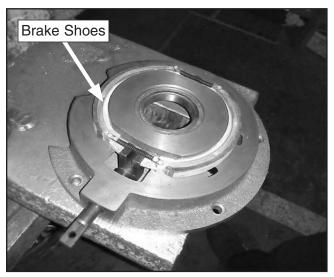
Lower pulley, shaft, and bearing sleeve removed to expose brake shoes for inspection/replacement.
